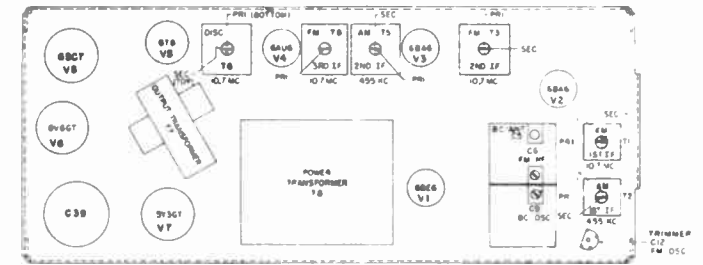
Tube and Trimmer Location (Radio Chassis)
